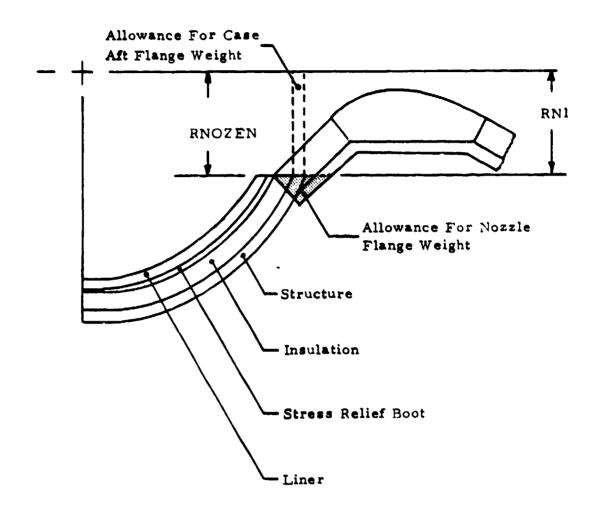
Dimensional Mismatch at Case-to-Nozzle Interface
